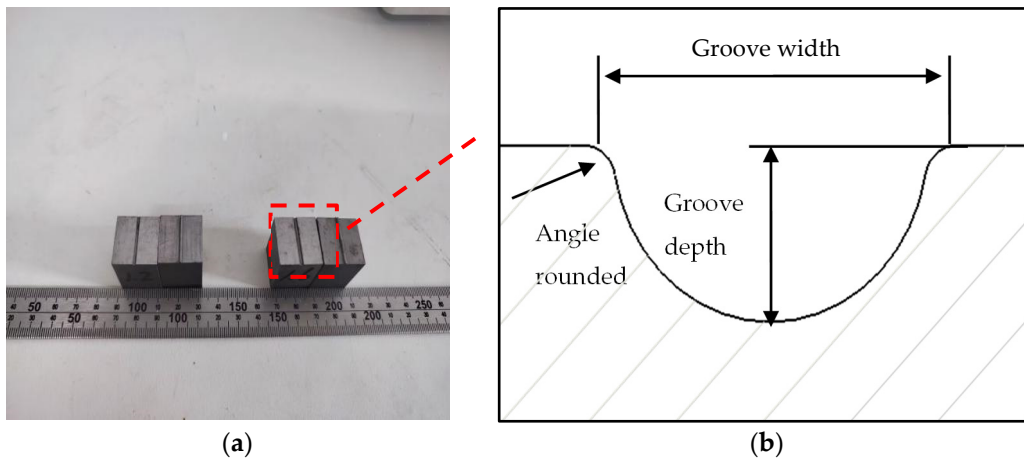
Single-channel convex and concave molds. (a) Physical diagram of the convex and concave molds. (b) Single-channel shape structure.
